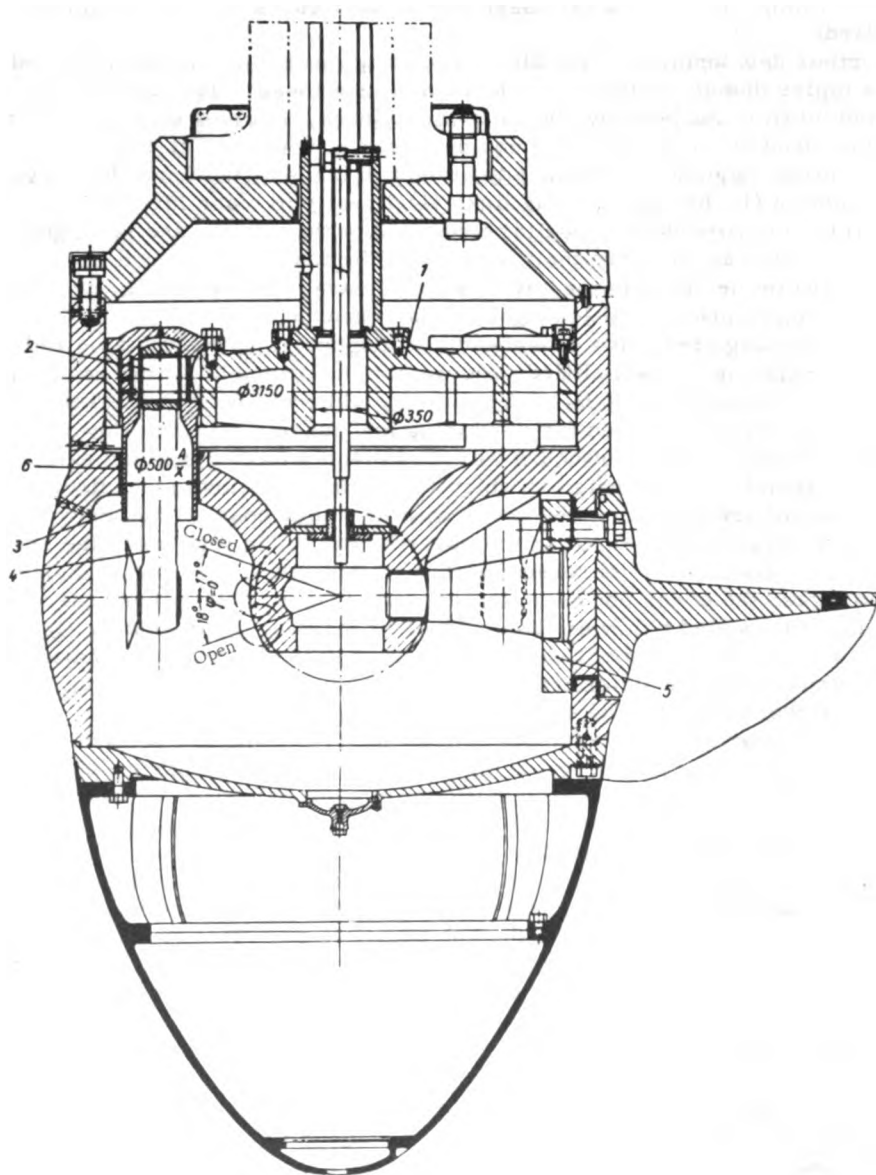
Blade-actuating mechanism with crank lever drive, without connecting rod or crosshead
